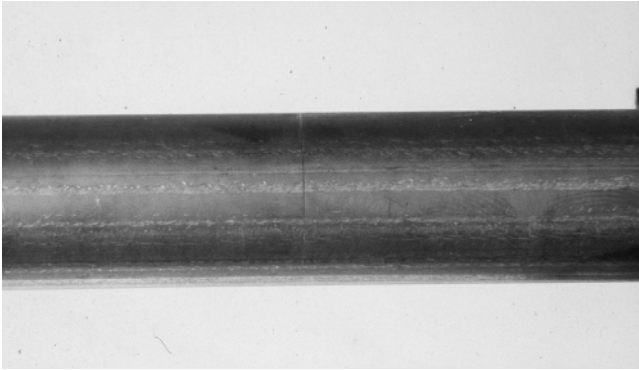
Fatigue Failure of a Titanium Tube in a Nuclear Power Plant Condenser (Pettigrew et al, 1991).
